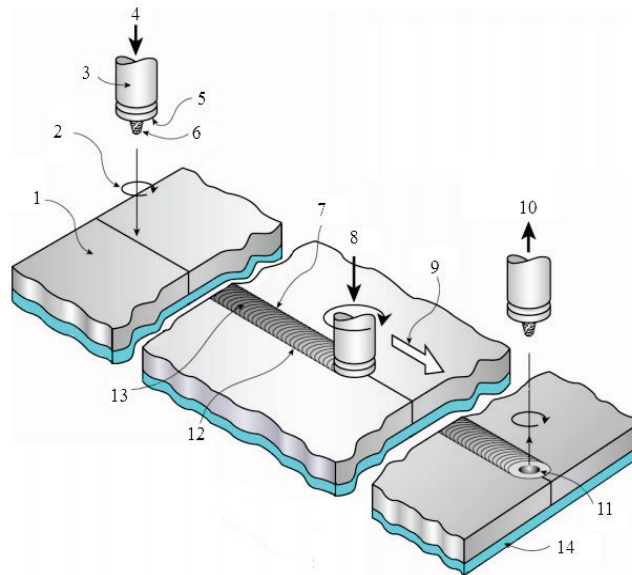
Illustrated scheme of friction stir welding [3] (1 - base metal, 2 - direction of tool rotation, 3 - weld tool, 4 - downward movement of tool, 5 – tool shoulder, 6 – pin, 7 - advancing side of weld, 8 - axial force, 9 - direction of welding, 10 - upward movement of tool, 11 - exit hole, 12 - retreating side of weld, 13 - weld face and 14 - base plate)
